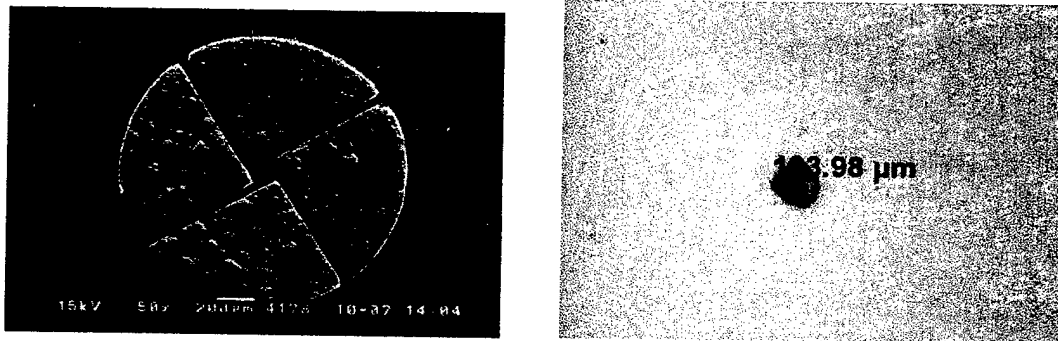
Injection molded ceramic fuel injector components. Mold inserts were fabricated using the LIGA process at LSU and injection molded at CoorsTek (Golden, CO). (a) Air swirler in YZTP. Good definition of the primary structure; (b) Injection nozzles were laser-drilled in some partially-debinded ceramic parts. Close-up of laser exit hole at 104  $\mu\text{m}$  diameter on a partially-debinded piece.
